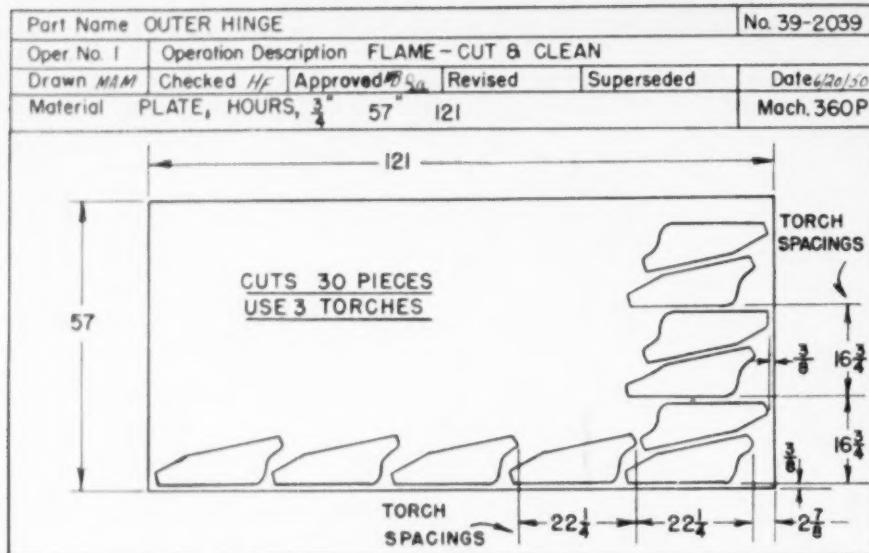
After the most efficient nesting layout has been determined on the board, the chart shown here is compiled for use by the flame-cutting machine operator to enable him to make his setup with a minimum of time loss as well as to assure maximum yield per plate.
